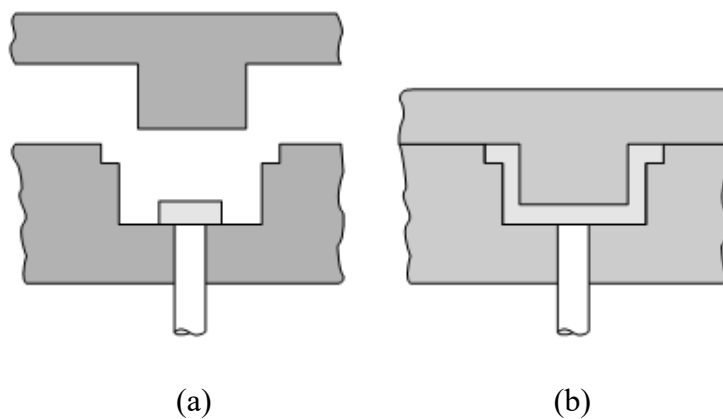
Schematic illustration of compression moulding process with mould open (female cavity on the bottom)(a) and mould closed (b)⁸⁹.
